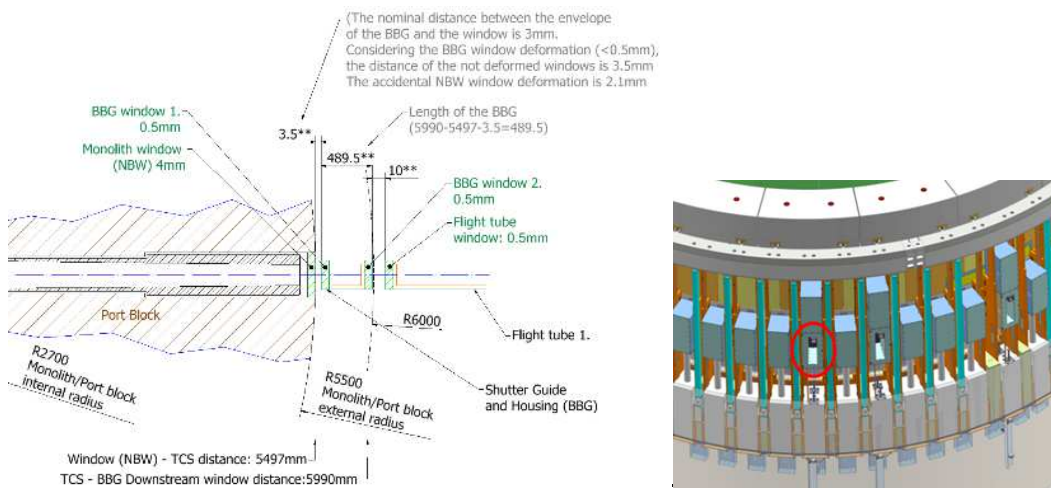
Location of the BBG assembly. Figure 14: Location of the BBG assembly within the light shutter.
